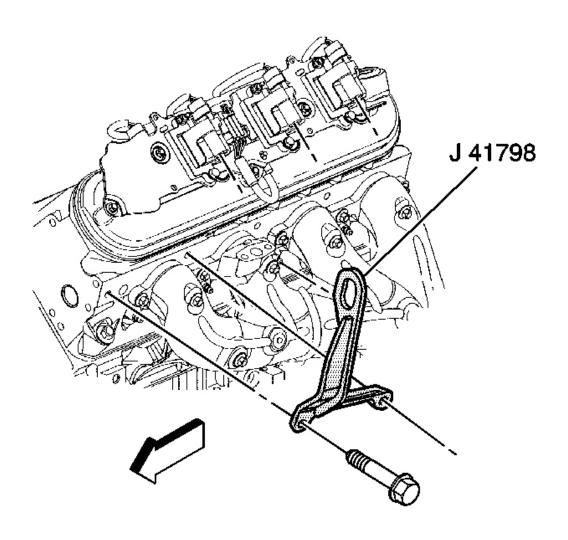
View Of J 41798 Courtesy of GENERAL MOTORS CORP.
